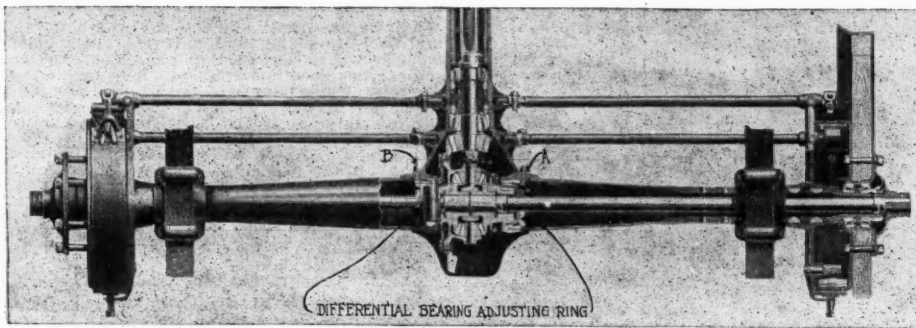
Rear axle of Dodge Brothers car, showing points of adjustment
